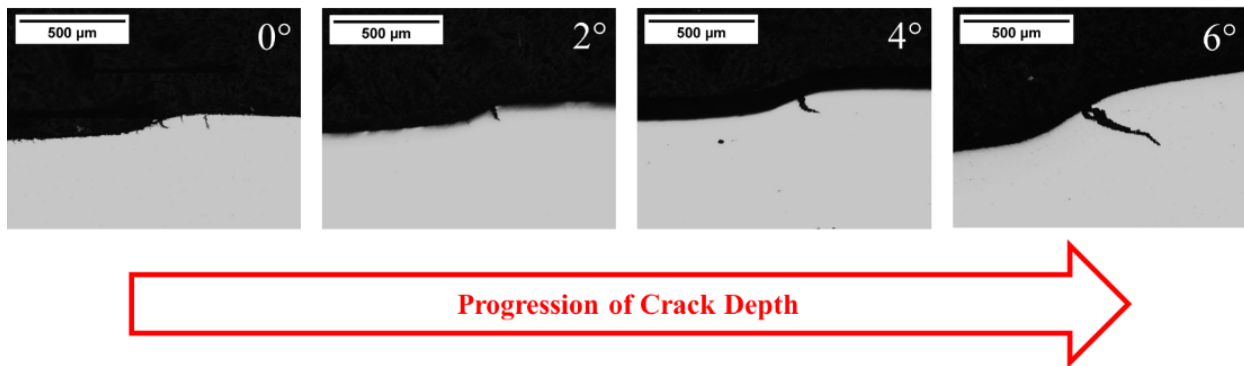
Typical weld shoulder LME cracks for each case showing a progression of crack size
